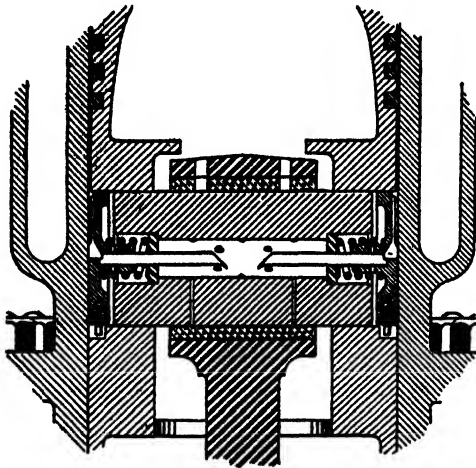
Lubricating the piston pin of a two-cycle engine.
